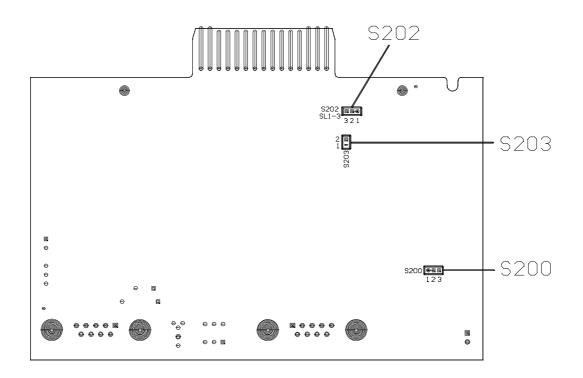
Position of solder bridges on the bottom layer of the PCB
